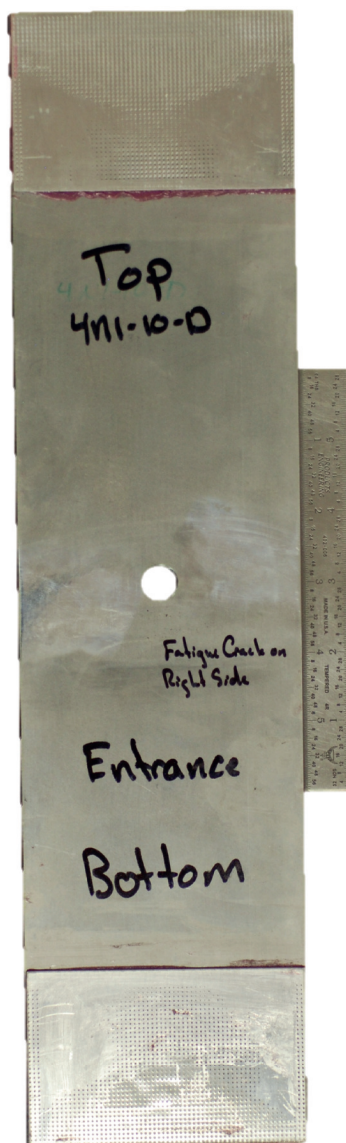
Image of Coupon Cx4N1-10-D (7075-T651) – Representing the Cx4N1 Fatigue Coupon Configuration Used for Fatigue Crack Development.
